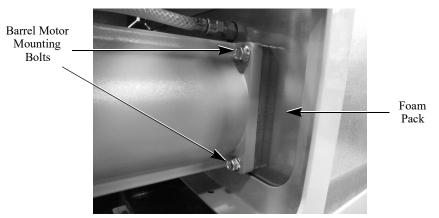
Side View of Motor Showing Two of the Four Mounting Bolts
